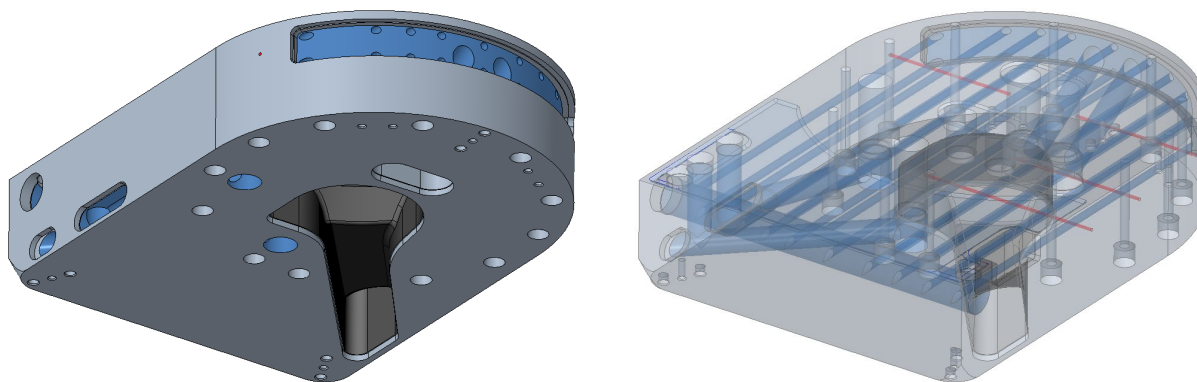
Lower backbone plate machined from stainless steel plate. Cooling holes are shown in blue, bolt holes in grey, and leak check access holes in red.
